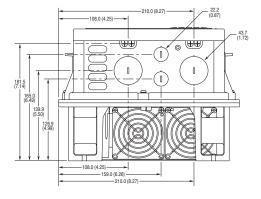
PowerFlex 70 IP20 / NEMA/UL Type 1 Bottom View Dimensions
